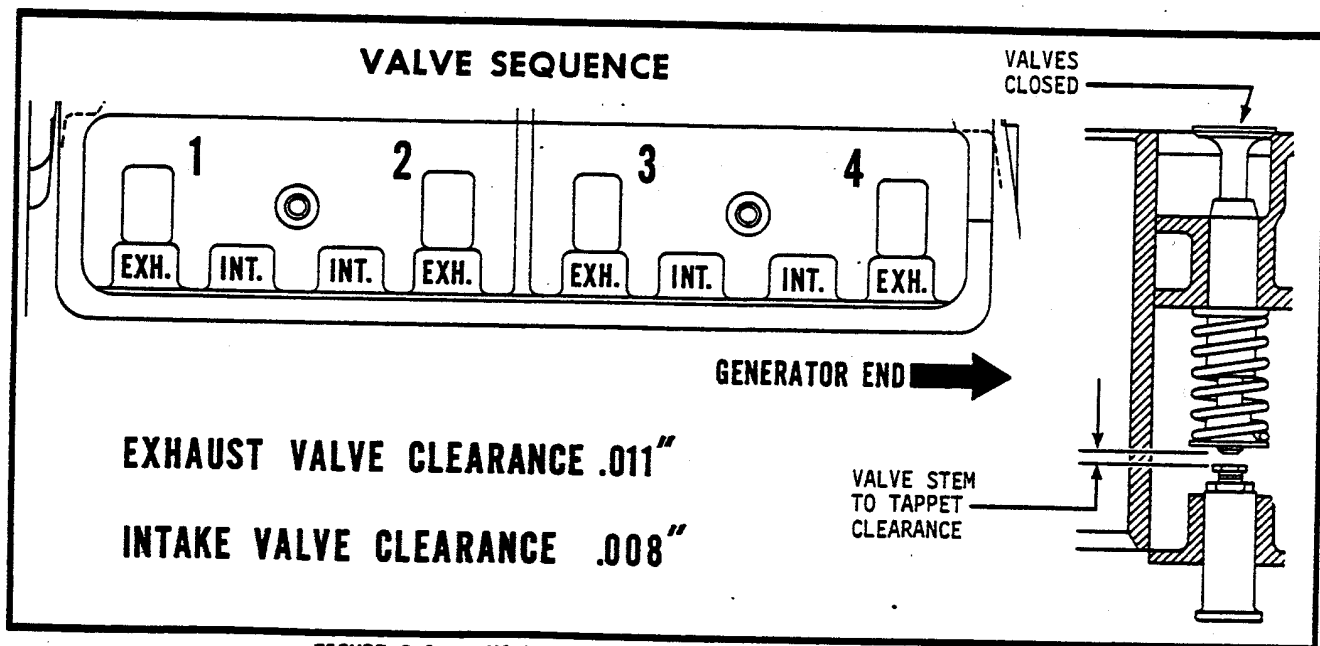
VALVE SEQUENCE--VALVE TO TAPPET CLEARANCE
